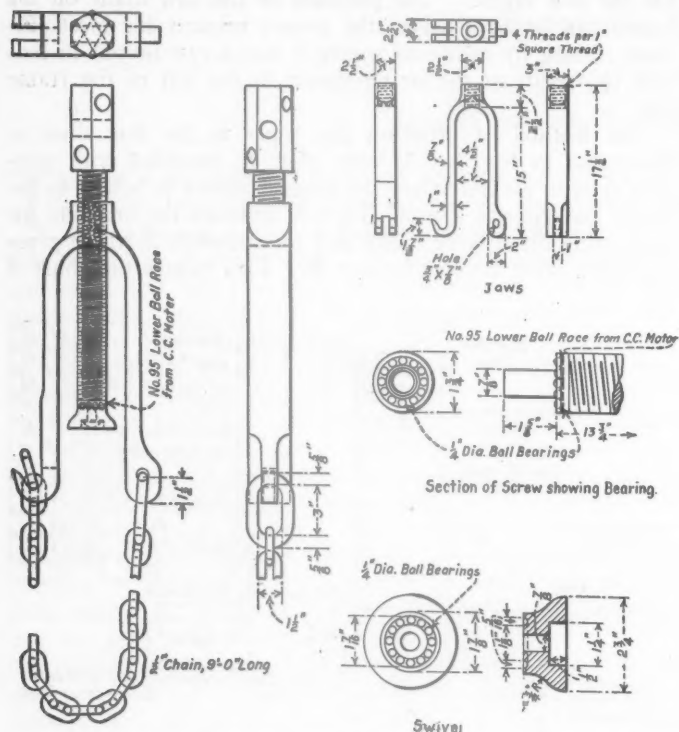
Driver and Traller Spring Puller with Ball Bearing Swivel
